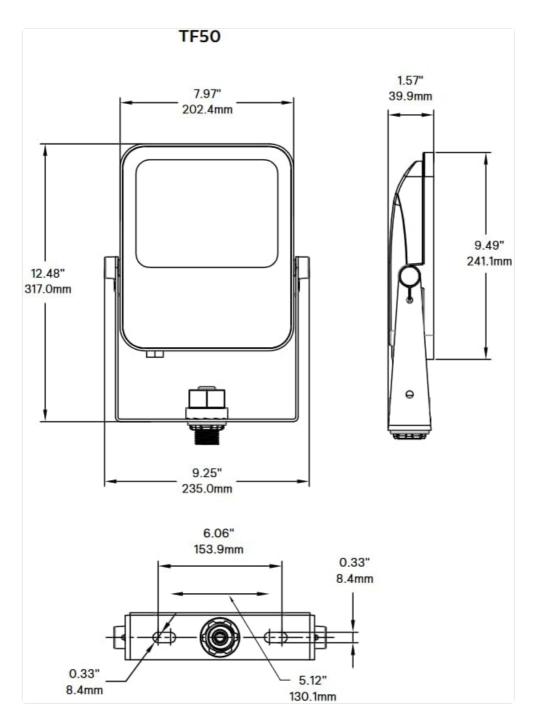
Dimensional drawing of the TF50 floodlight, providing measurements for installation planning.
